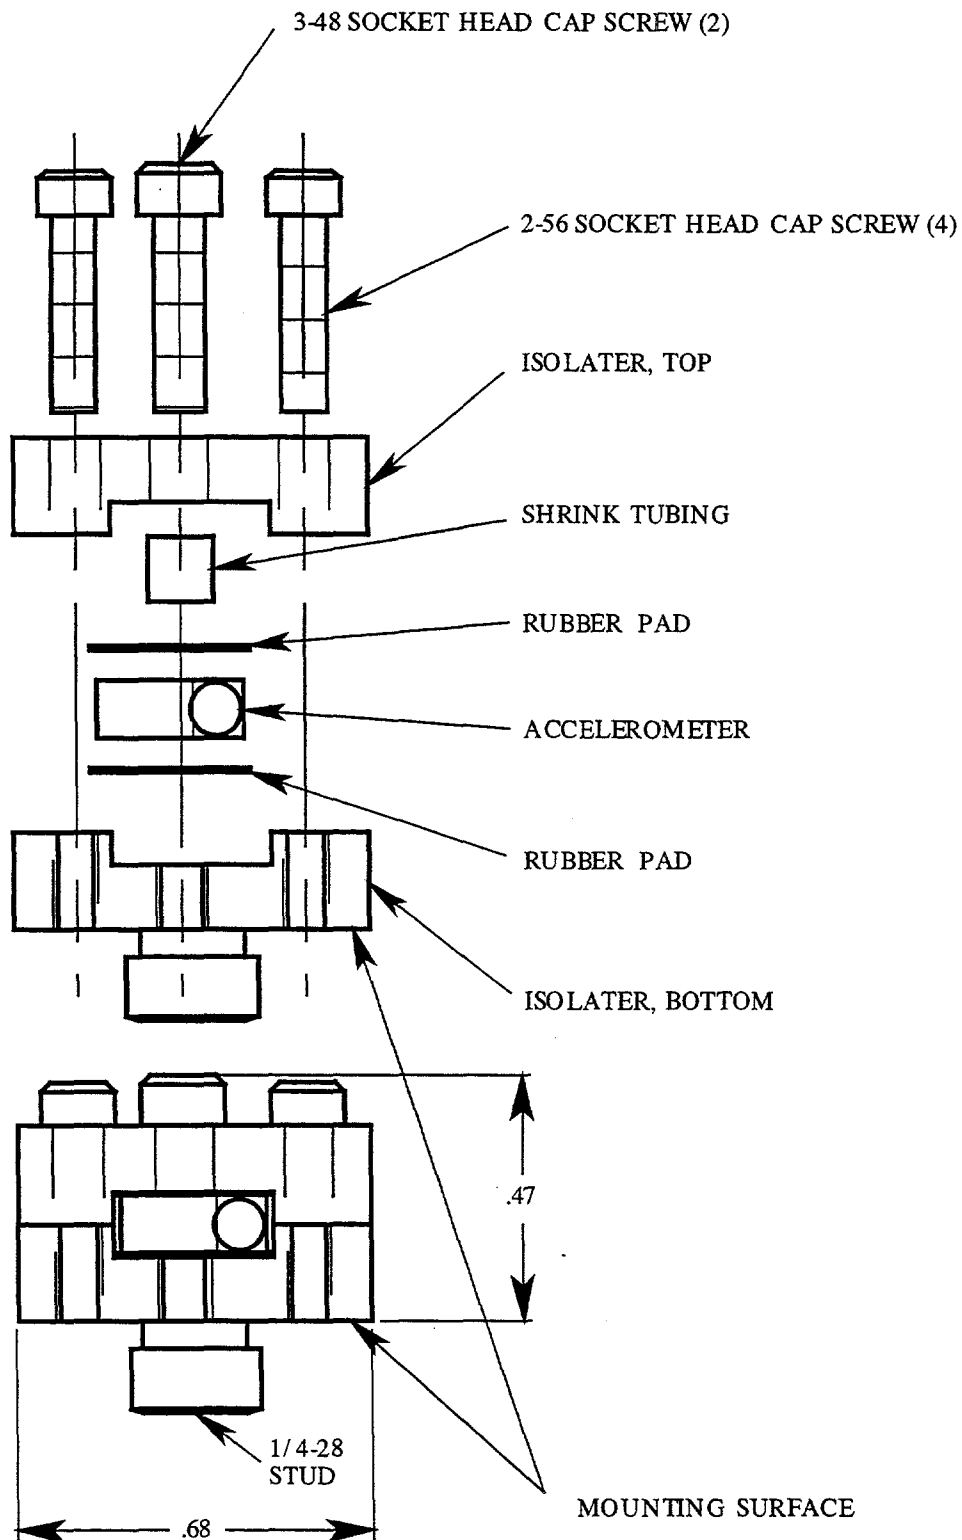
Exploded View of Improved SNL Mechanical Isolator with Acceptable Performance to 60,000 g for DC-10 kHz.
